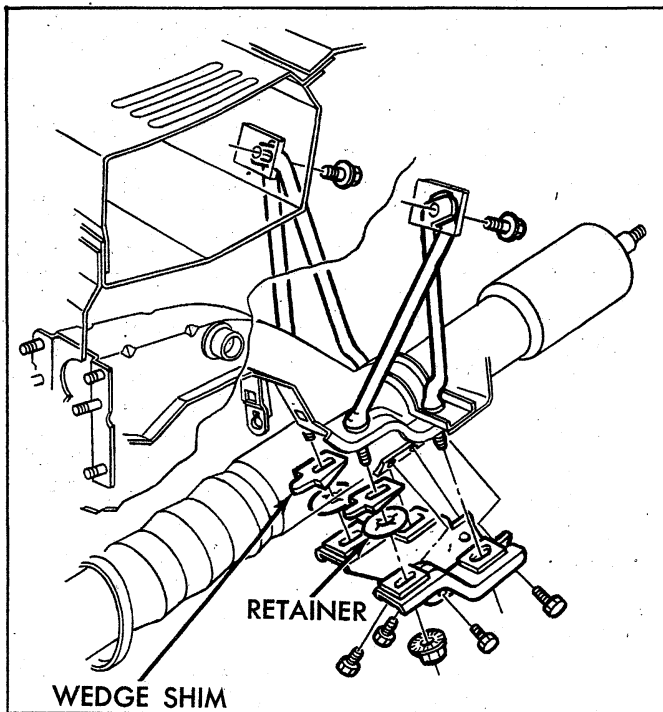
Instrument Panel Mounting Bracket—Chevrolet
